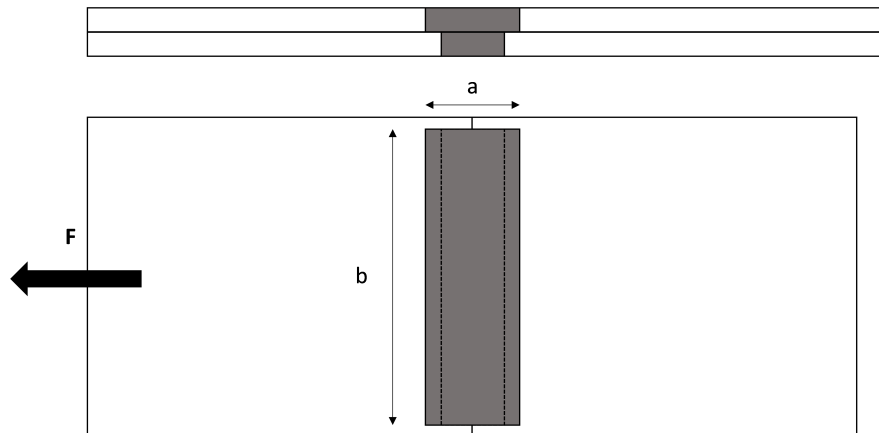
Geometry of the initially calculated FSW weld
